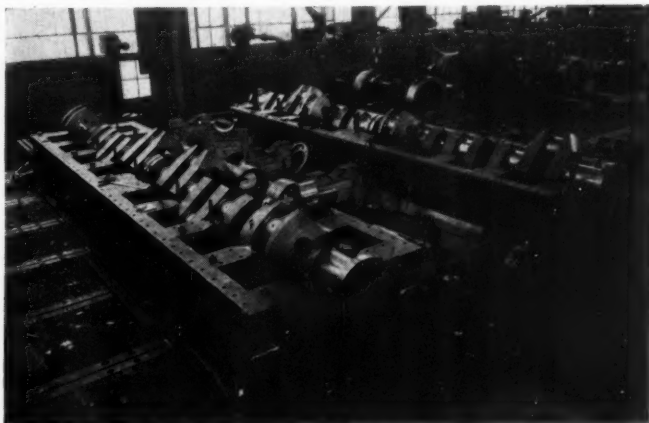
Bedding a pair of 8-cylinder crankshafts for 1500-horsepower engines
